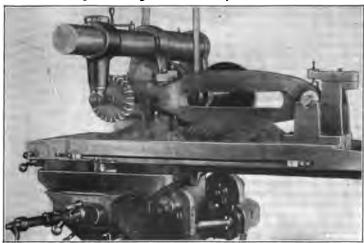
Finishing End of Rocker-arm with Straddle Mill
